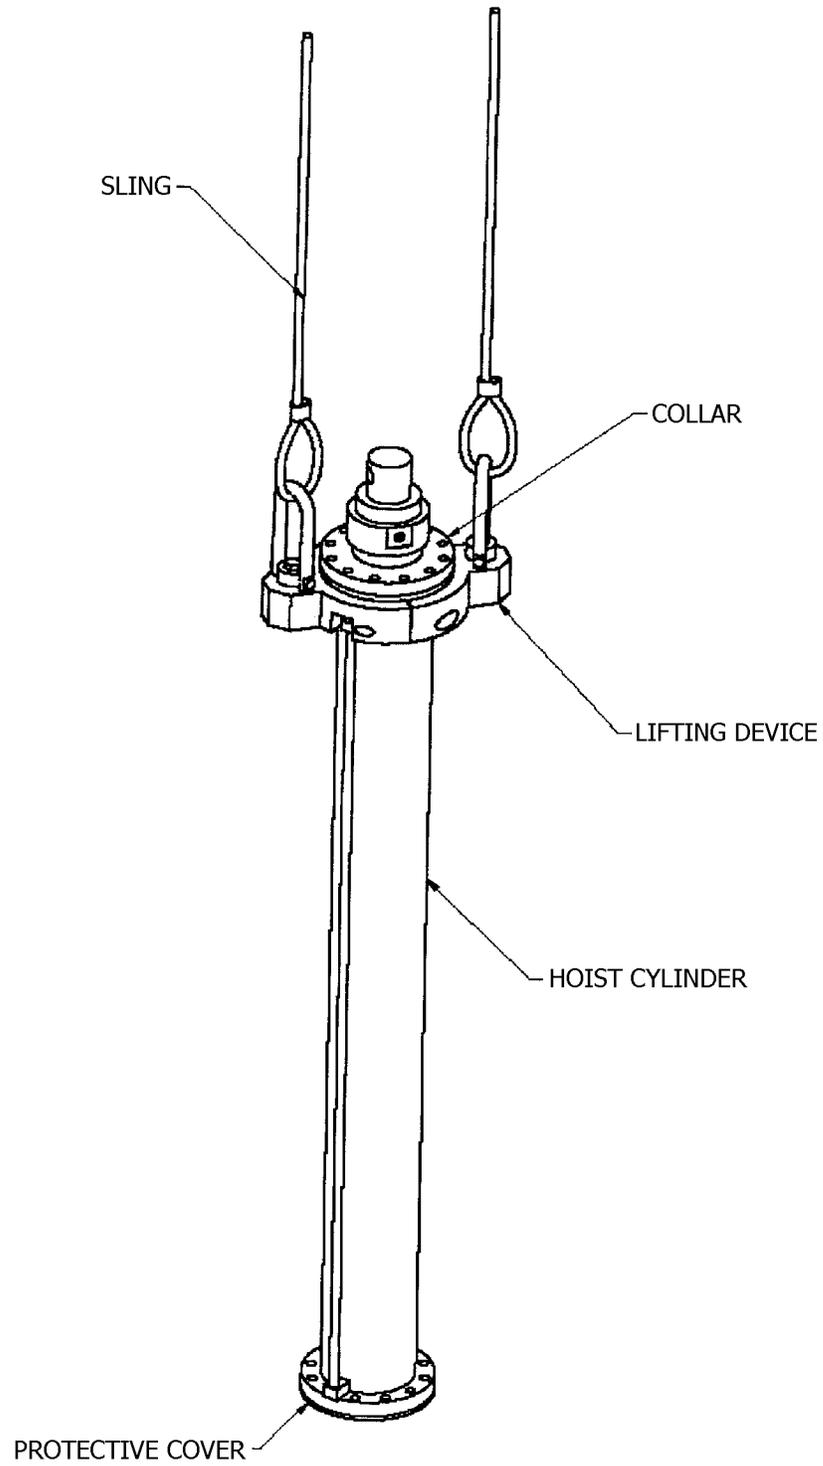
Installation of Hoist Cylinder Lifting Device (Assy 377)
